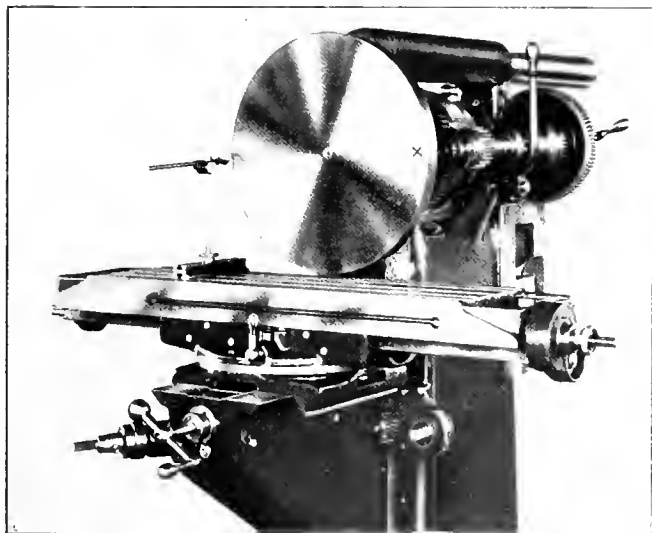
Testing Alignment of T-slot with Spindle. Reading taken as shown, and on other Side of Spindle at X, with Plate turned One-half Revolution.
